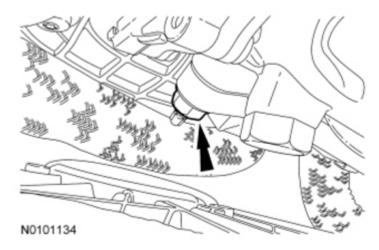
Locating Bolts And Auxiliary Coolant Pump Electrical Connector Courtesy of FORD MOTOR CO.
